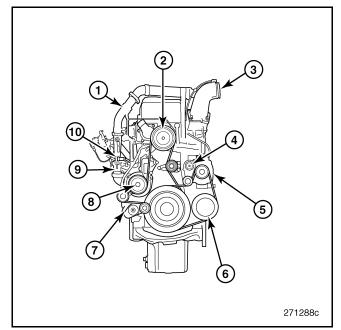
Primary and Secondary Drive Belts — Conventional Chassis
